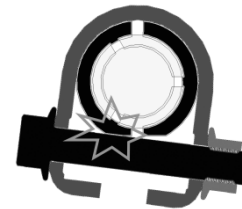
I-BEAM FRONT AXLE DRAG LINK
